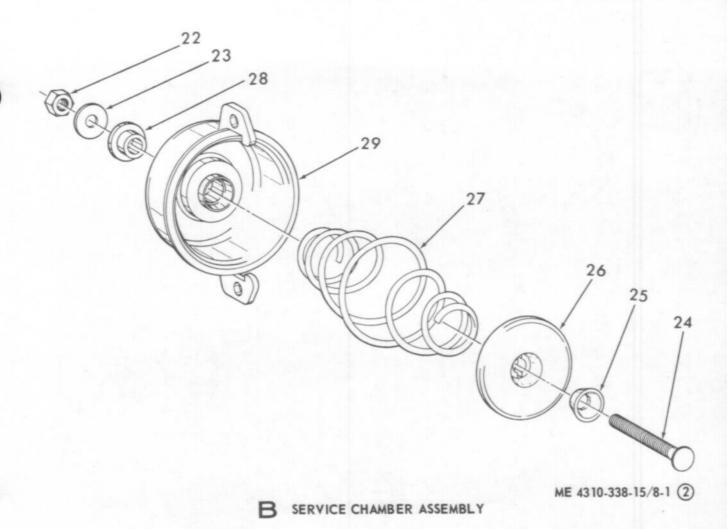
Spring brake-service chamber assembly, disassembly and reassembly, (sheet 2 of 2).
